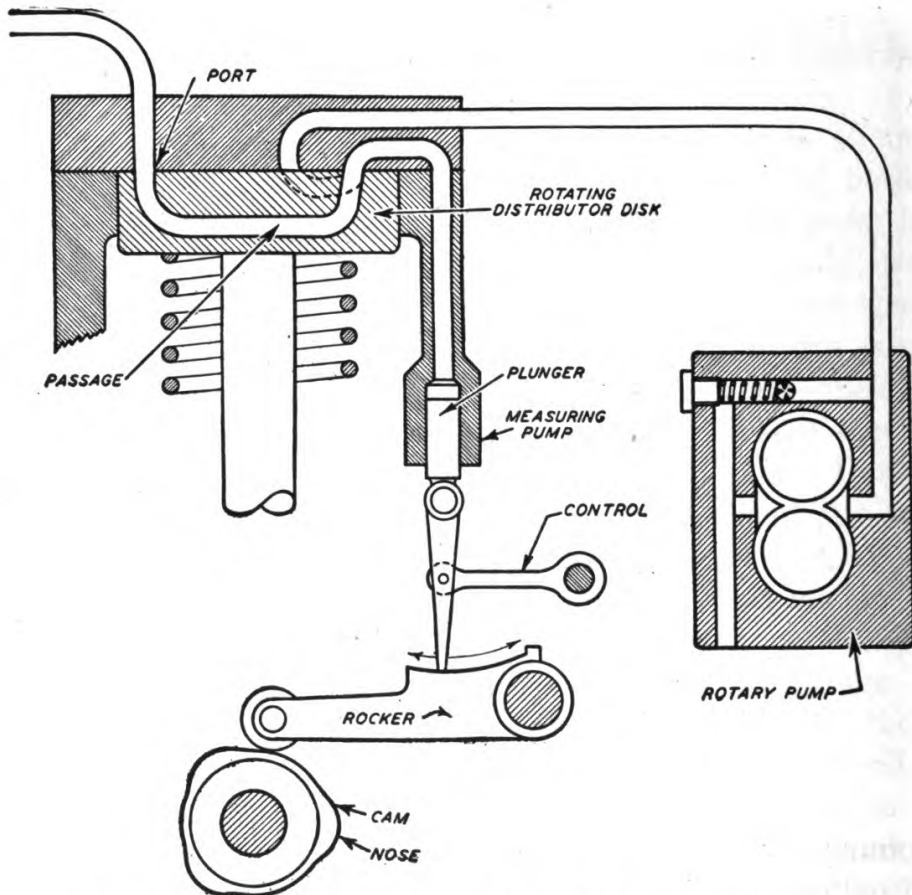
Fuel Pump Delivered through a Distributor to the Several Engine Cylinders
